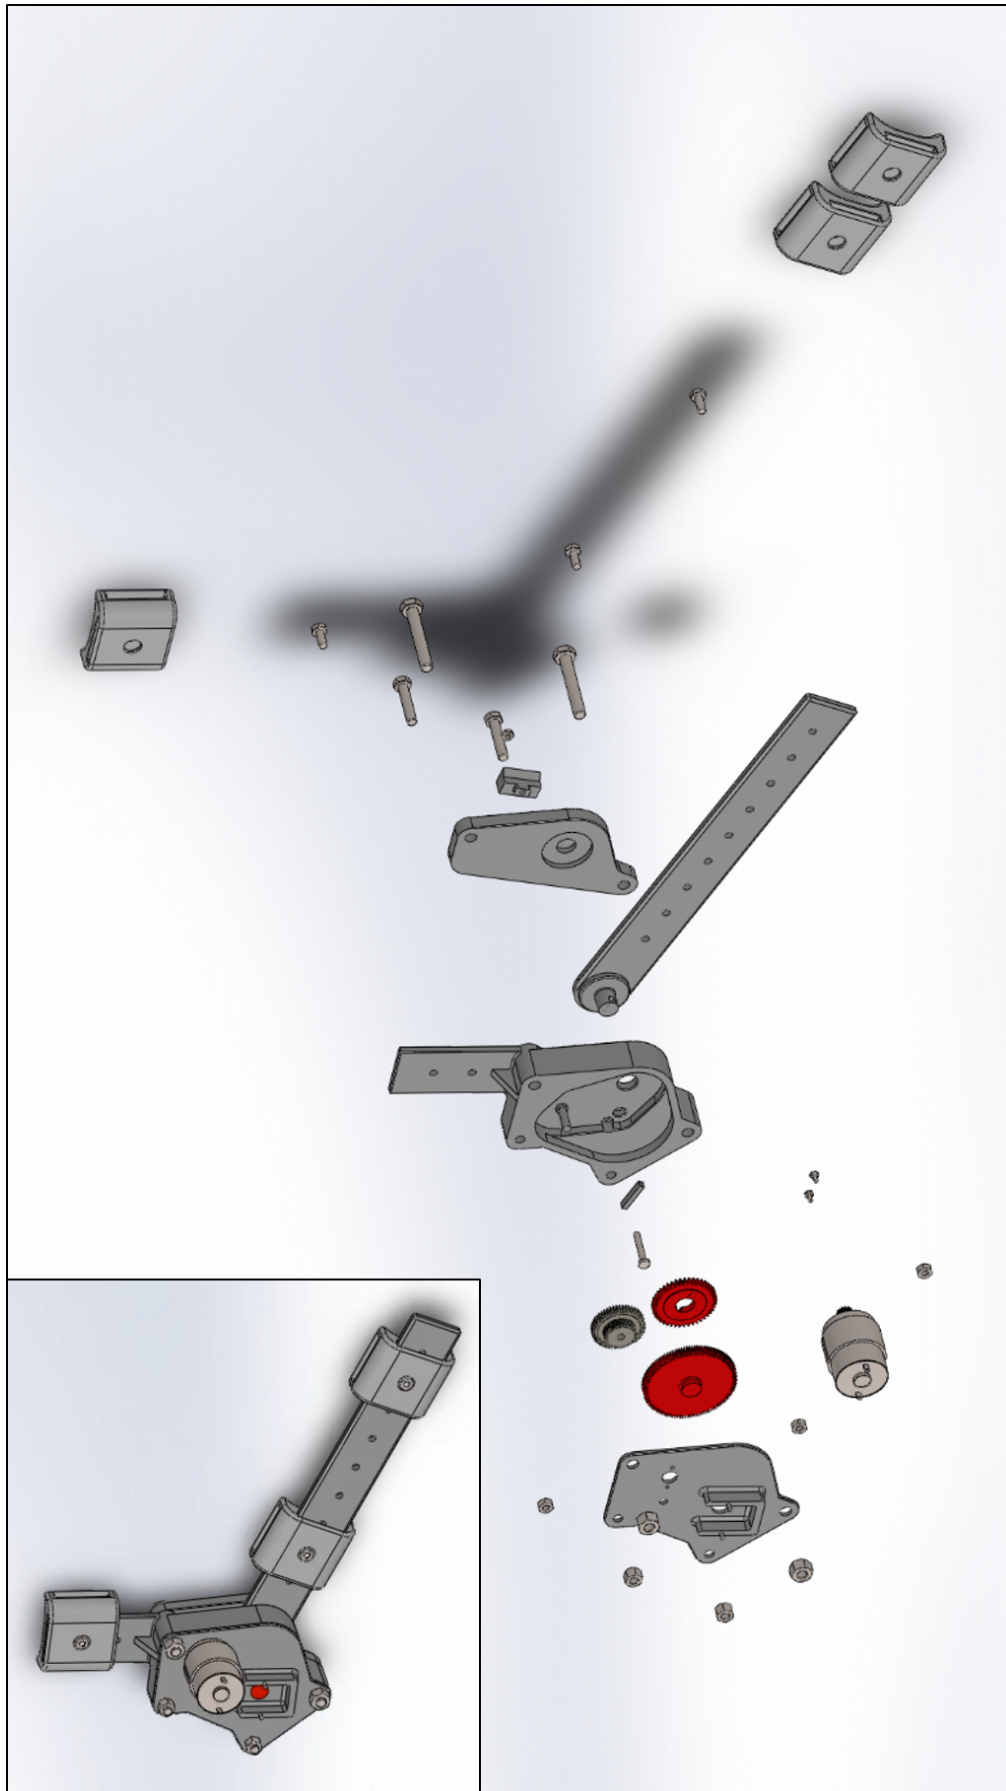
Exploded and (top left) collapsed views of the 3D printed device. In addition to the components of Figure C.1, the DC motor, the Gears 2-3 Piece and buckles for in-person fixation, as well as screws and nuts can be seen.
